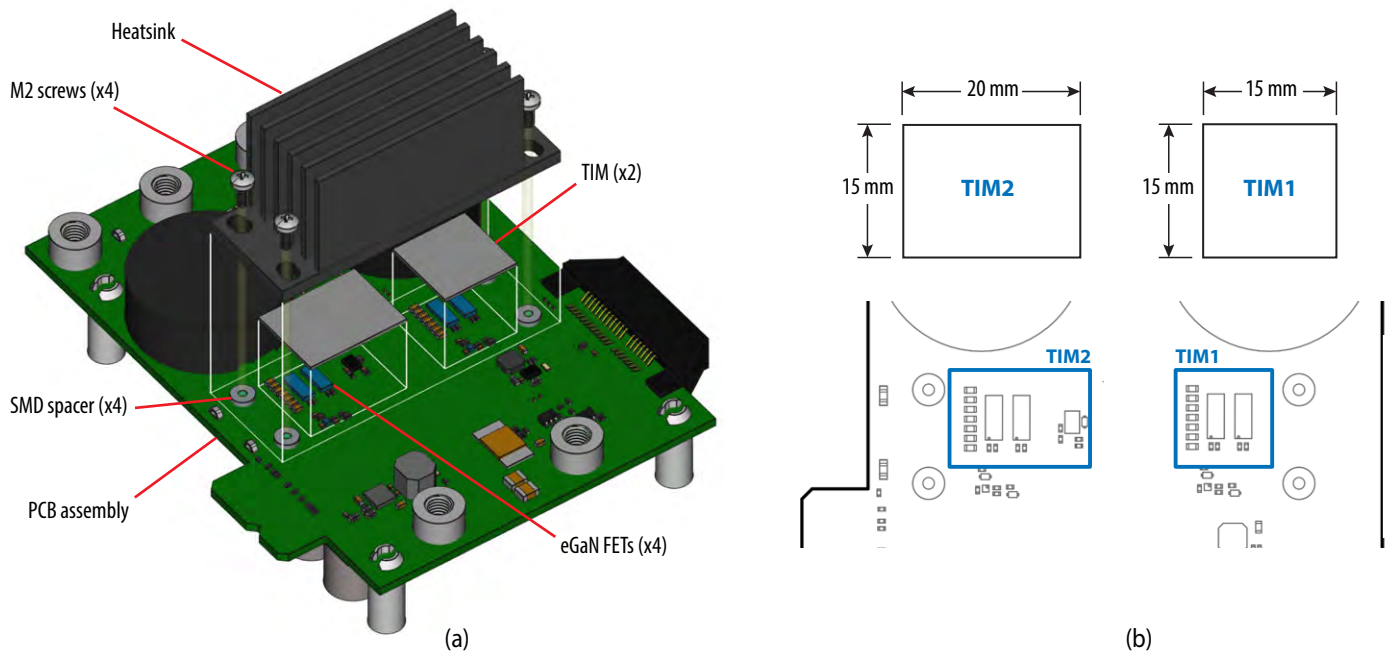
Details for attaching a heatsink to the board. (a) exploded 3D perspective, (b) top view showing the TIM location with respect to the eGaN FETs
